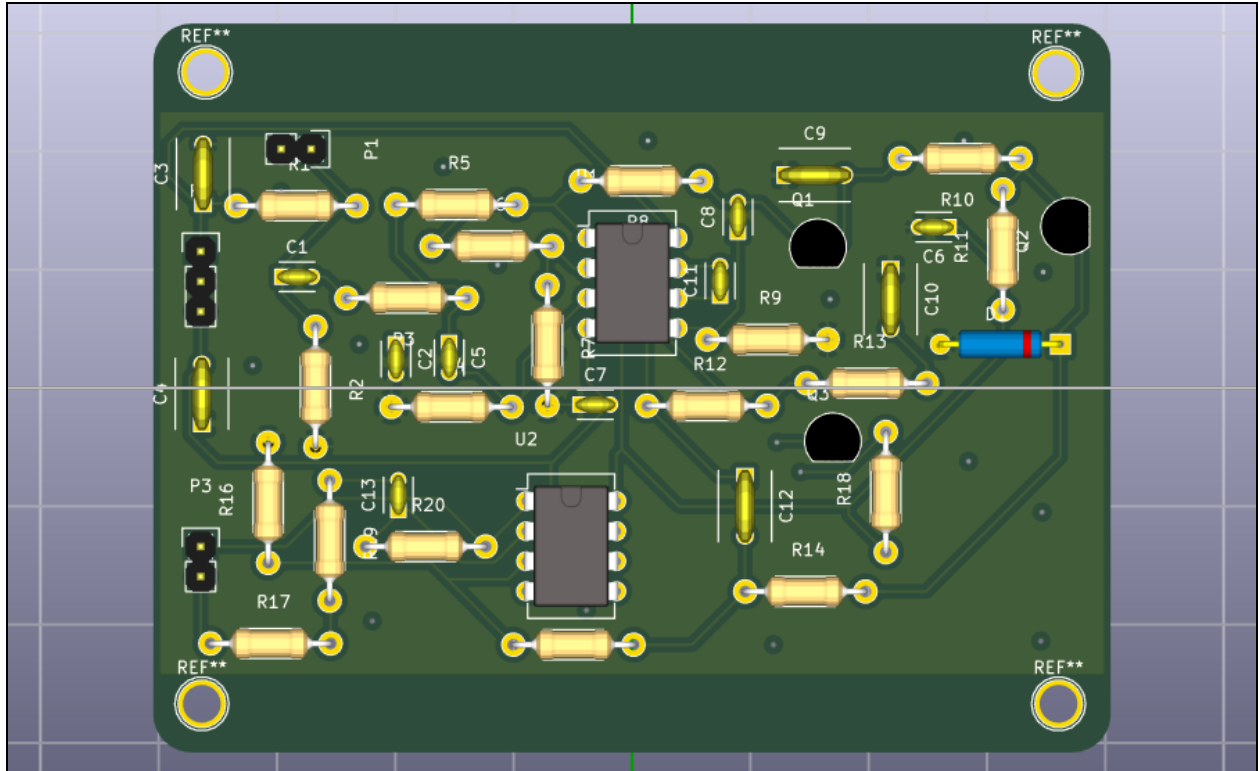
KiCad PCB Rendering. 3D Rendering of board design in KiCad
